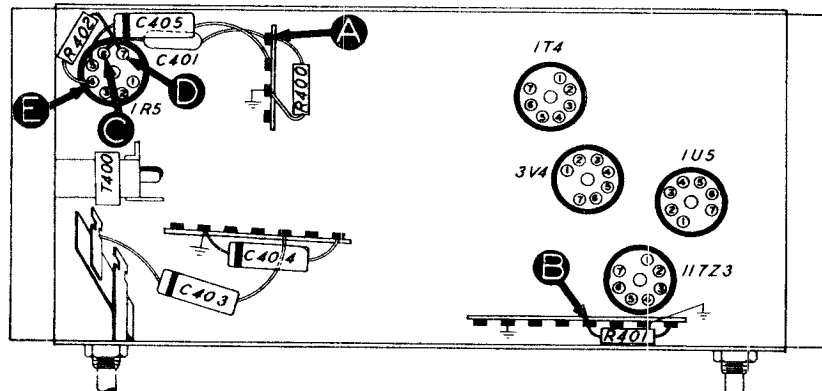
BOTTOM VIEW, SHOWING SECTION 4 TEST POINTS TP-4099D
